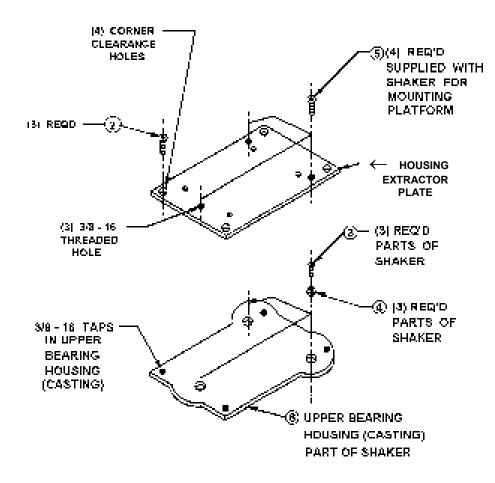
Upper Bearing Housing & Extractor Plate Detail
